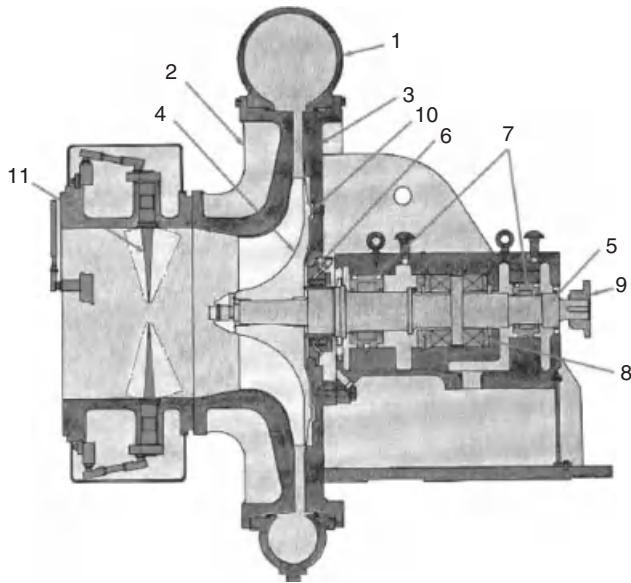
Single-stage overhung centrifugal compressor. 1, Casing; 2, inlet cover; 3, back plate; 4, rotor; 5, shaft; 6, seal; 7, bearing; 8, thrust bearing; 9, coupling hub; 10, balance plane; 11, variable IGV. (Courtesy of A. C. Compressors.)
